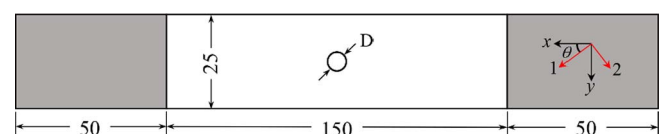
Geometry and dimensions of specimen (dimensions in mm).
